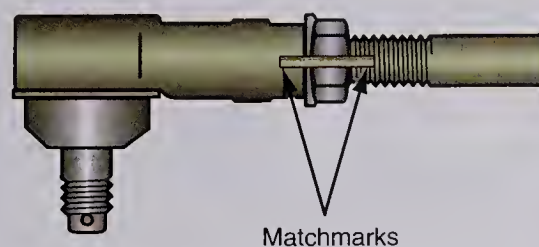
Marking outer tie-rod ends, jam nuts, and tie-rods prior to outer tie-rod end removal.
